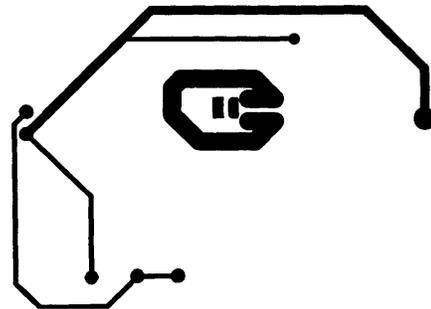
Recommended 20-pin DSBGA PC Board Layout: Lower Inner-Layer Layout
